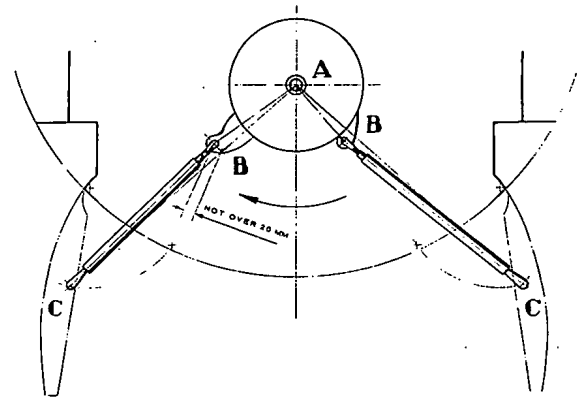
DIAGRAM OF BOMB-BAY DOOR CONTROL ROD KINEMATIC LOCK
